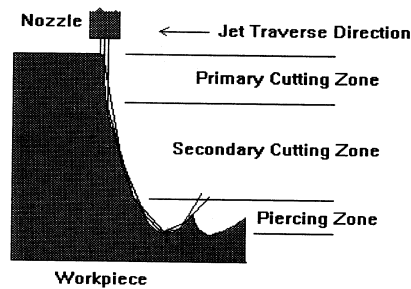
The three zones recognized in abrasive waterjet cutting process [2].
